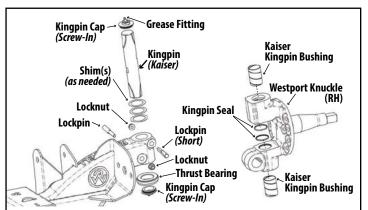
233-13K Drum brake axle (Westport knuckle; Kaiser KP)
